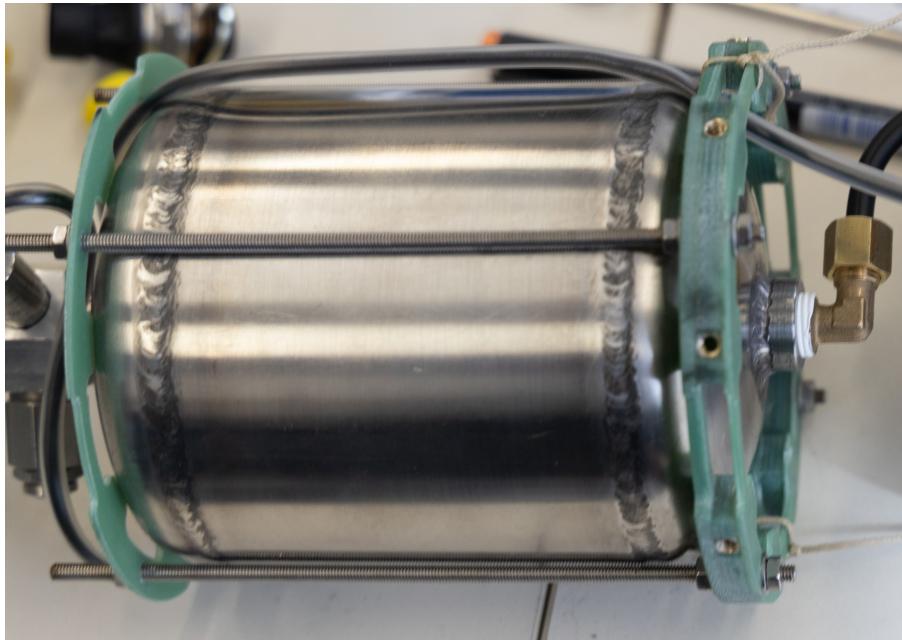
Steel Prototype Fuel Tank in its mounting cage
